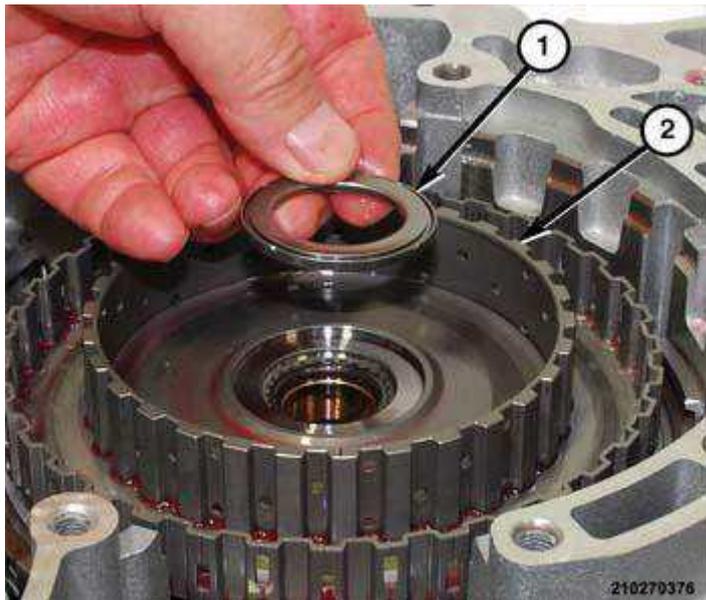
3/5/R Clutch & 2/6 Brake Hub, Thrust Bearing
